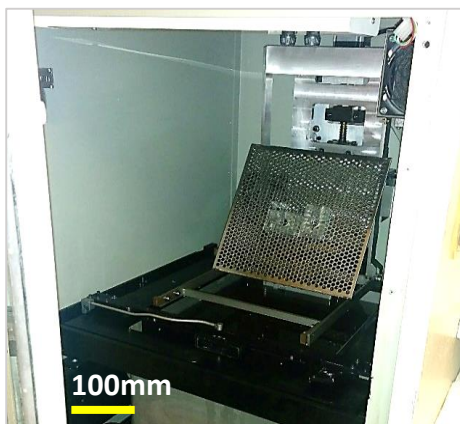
Fabrication of fixture in Viper Laser Stereolithography Forming Center.
